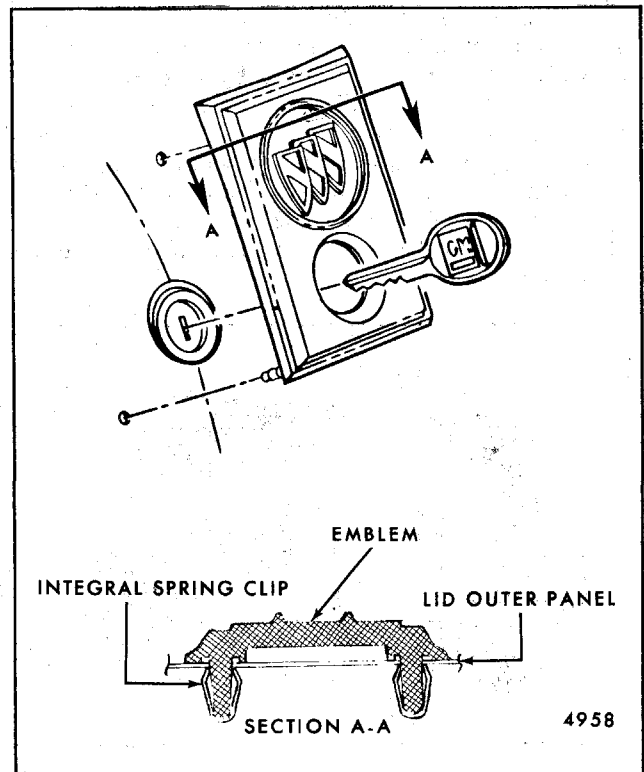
Typical Fixed Emblem - Integral Clip Retained
